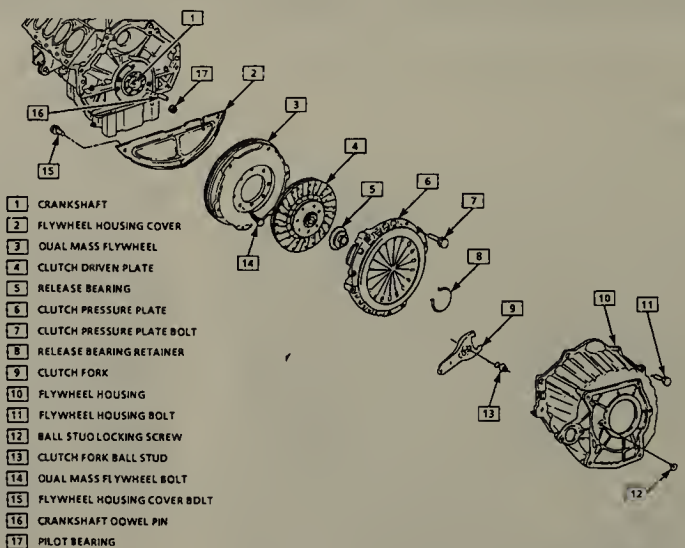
Exploded view of the clutch system components—1995 5.7L (VIN J) engine shown, other engine similar
